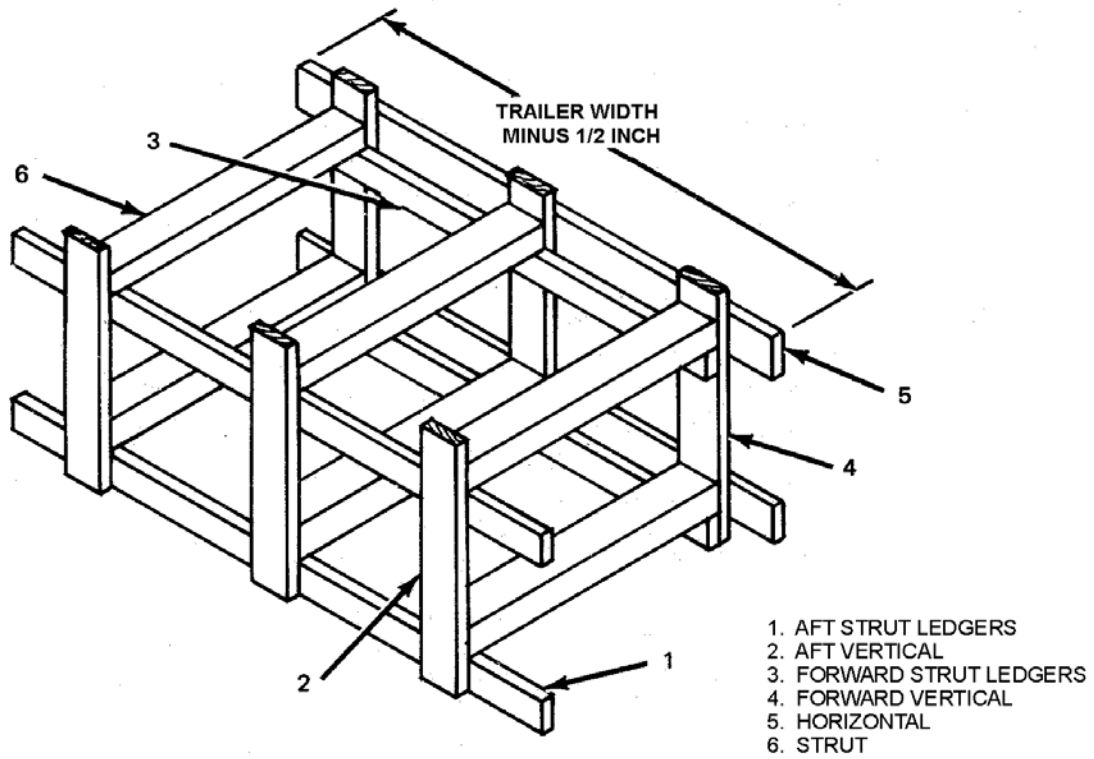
Typical forward blocking assembly used to fill a void.
